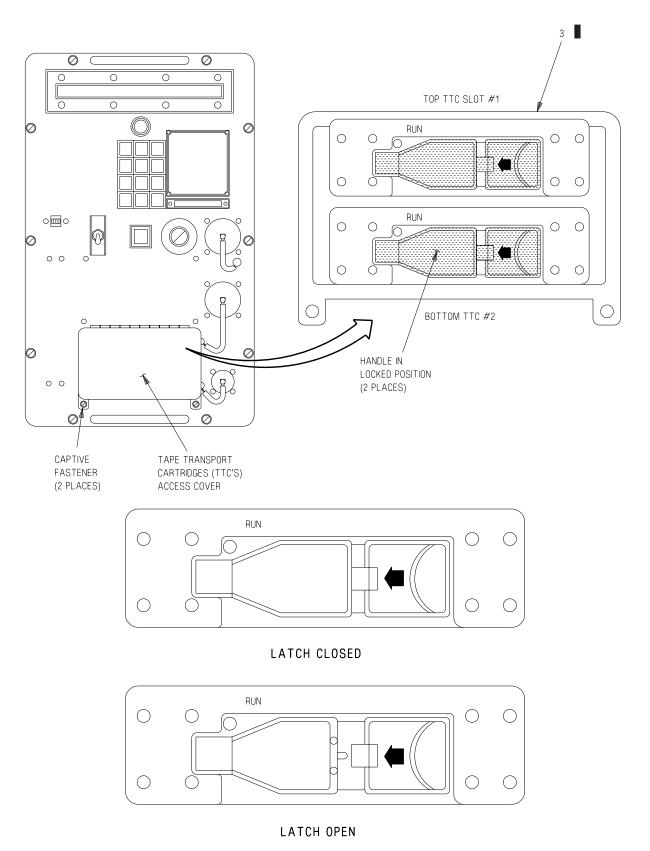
Test Equipment Hookup Locator (Sheet 2)
